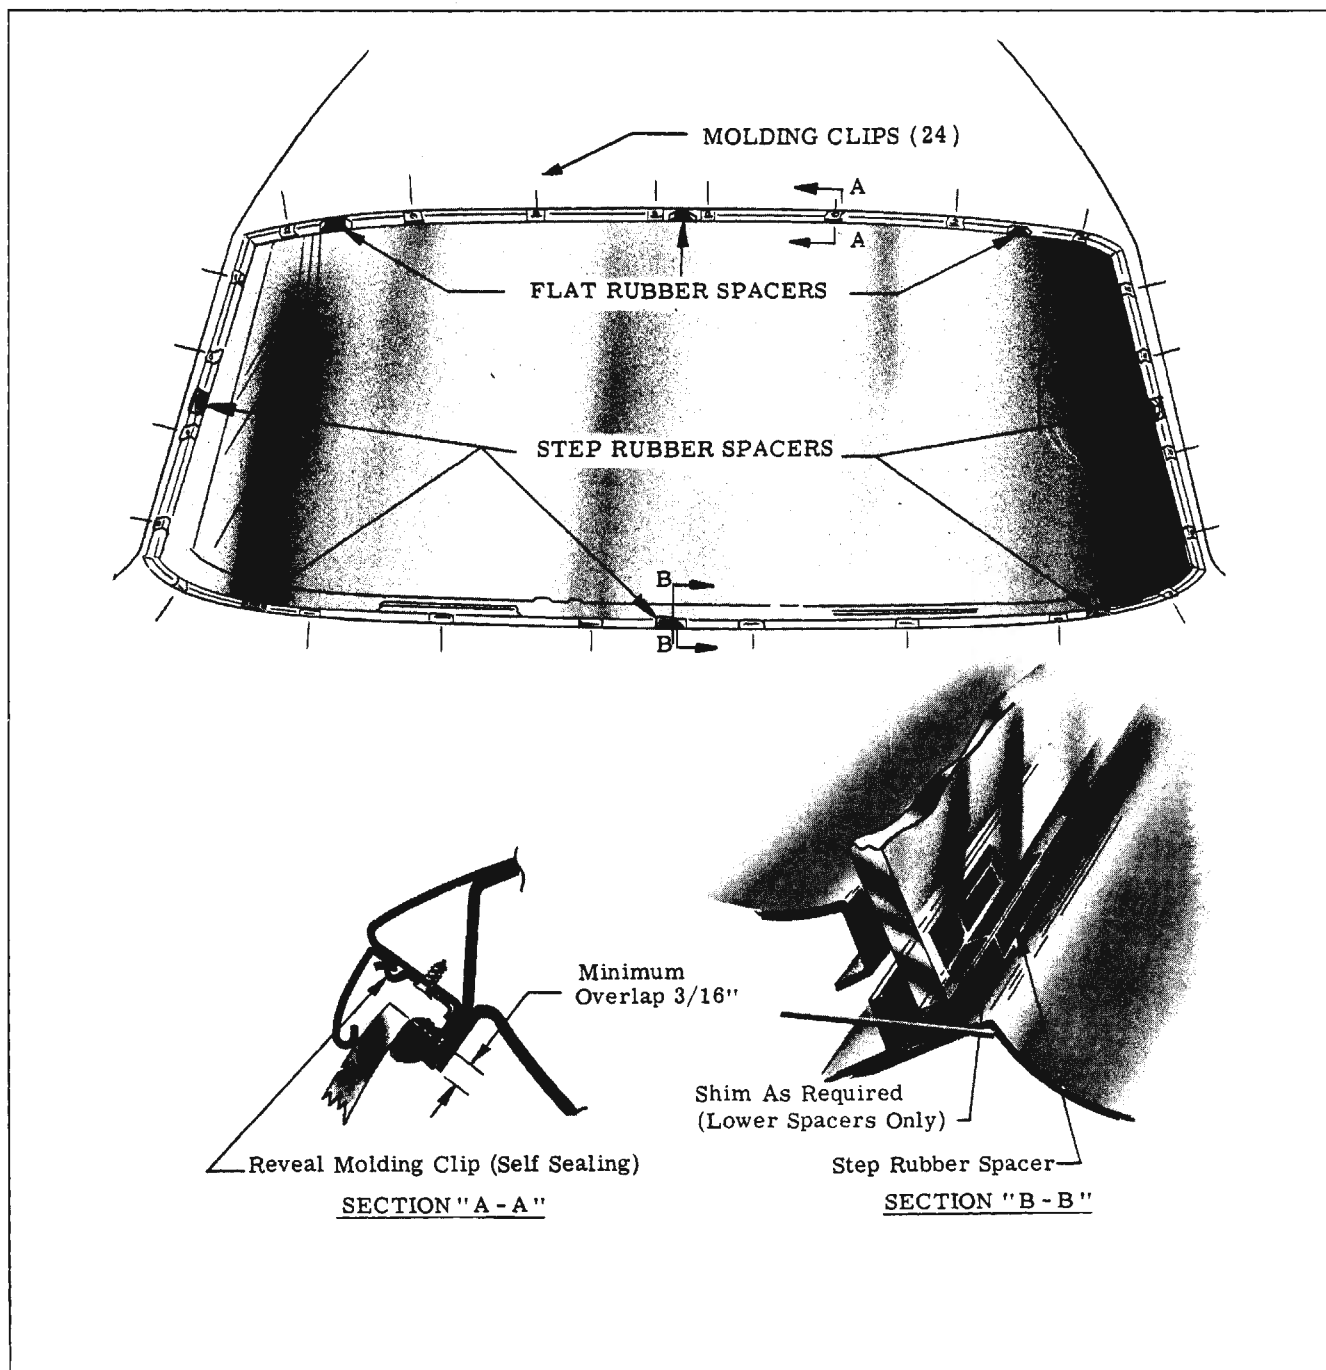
Windshield Spacer and Reveal Molding Clip Locations (Extended Method)
